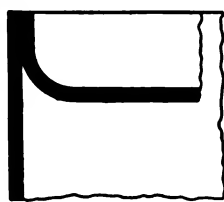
Head Weld for Storage and Medium-Pressure Tanks
